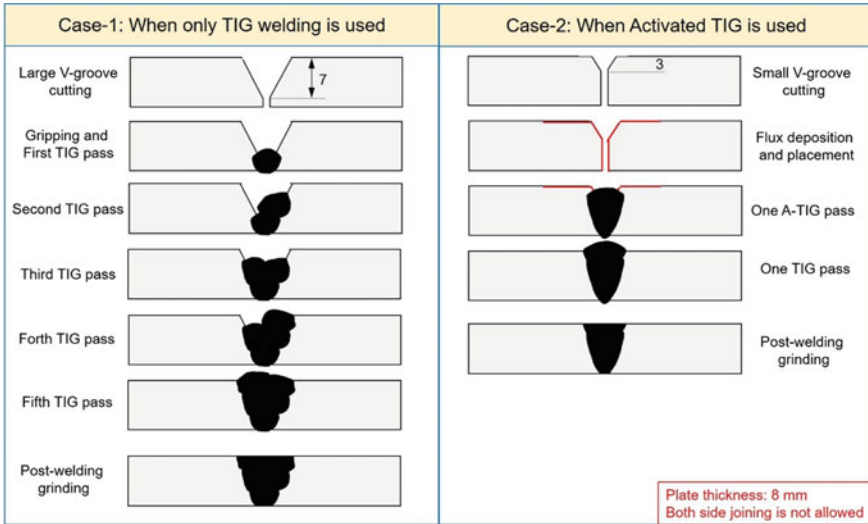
Schematic of the welding steps when joining from only one side is allowed [7]
